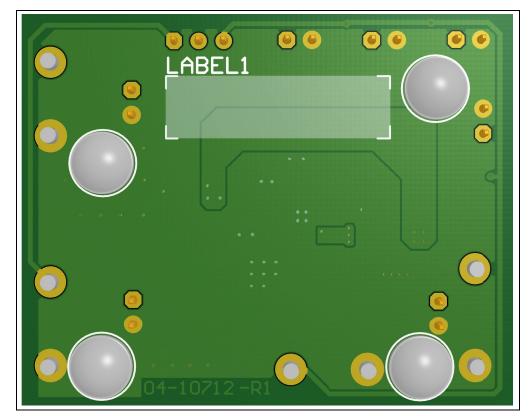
MIC2800 Evaluation Board – 3D Bottom View.
